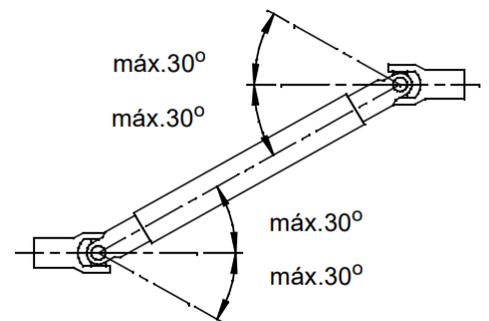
Ex. maximum working angle of the cardan shaft
